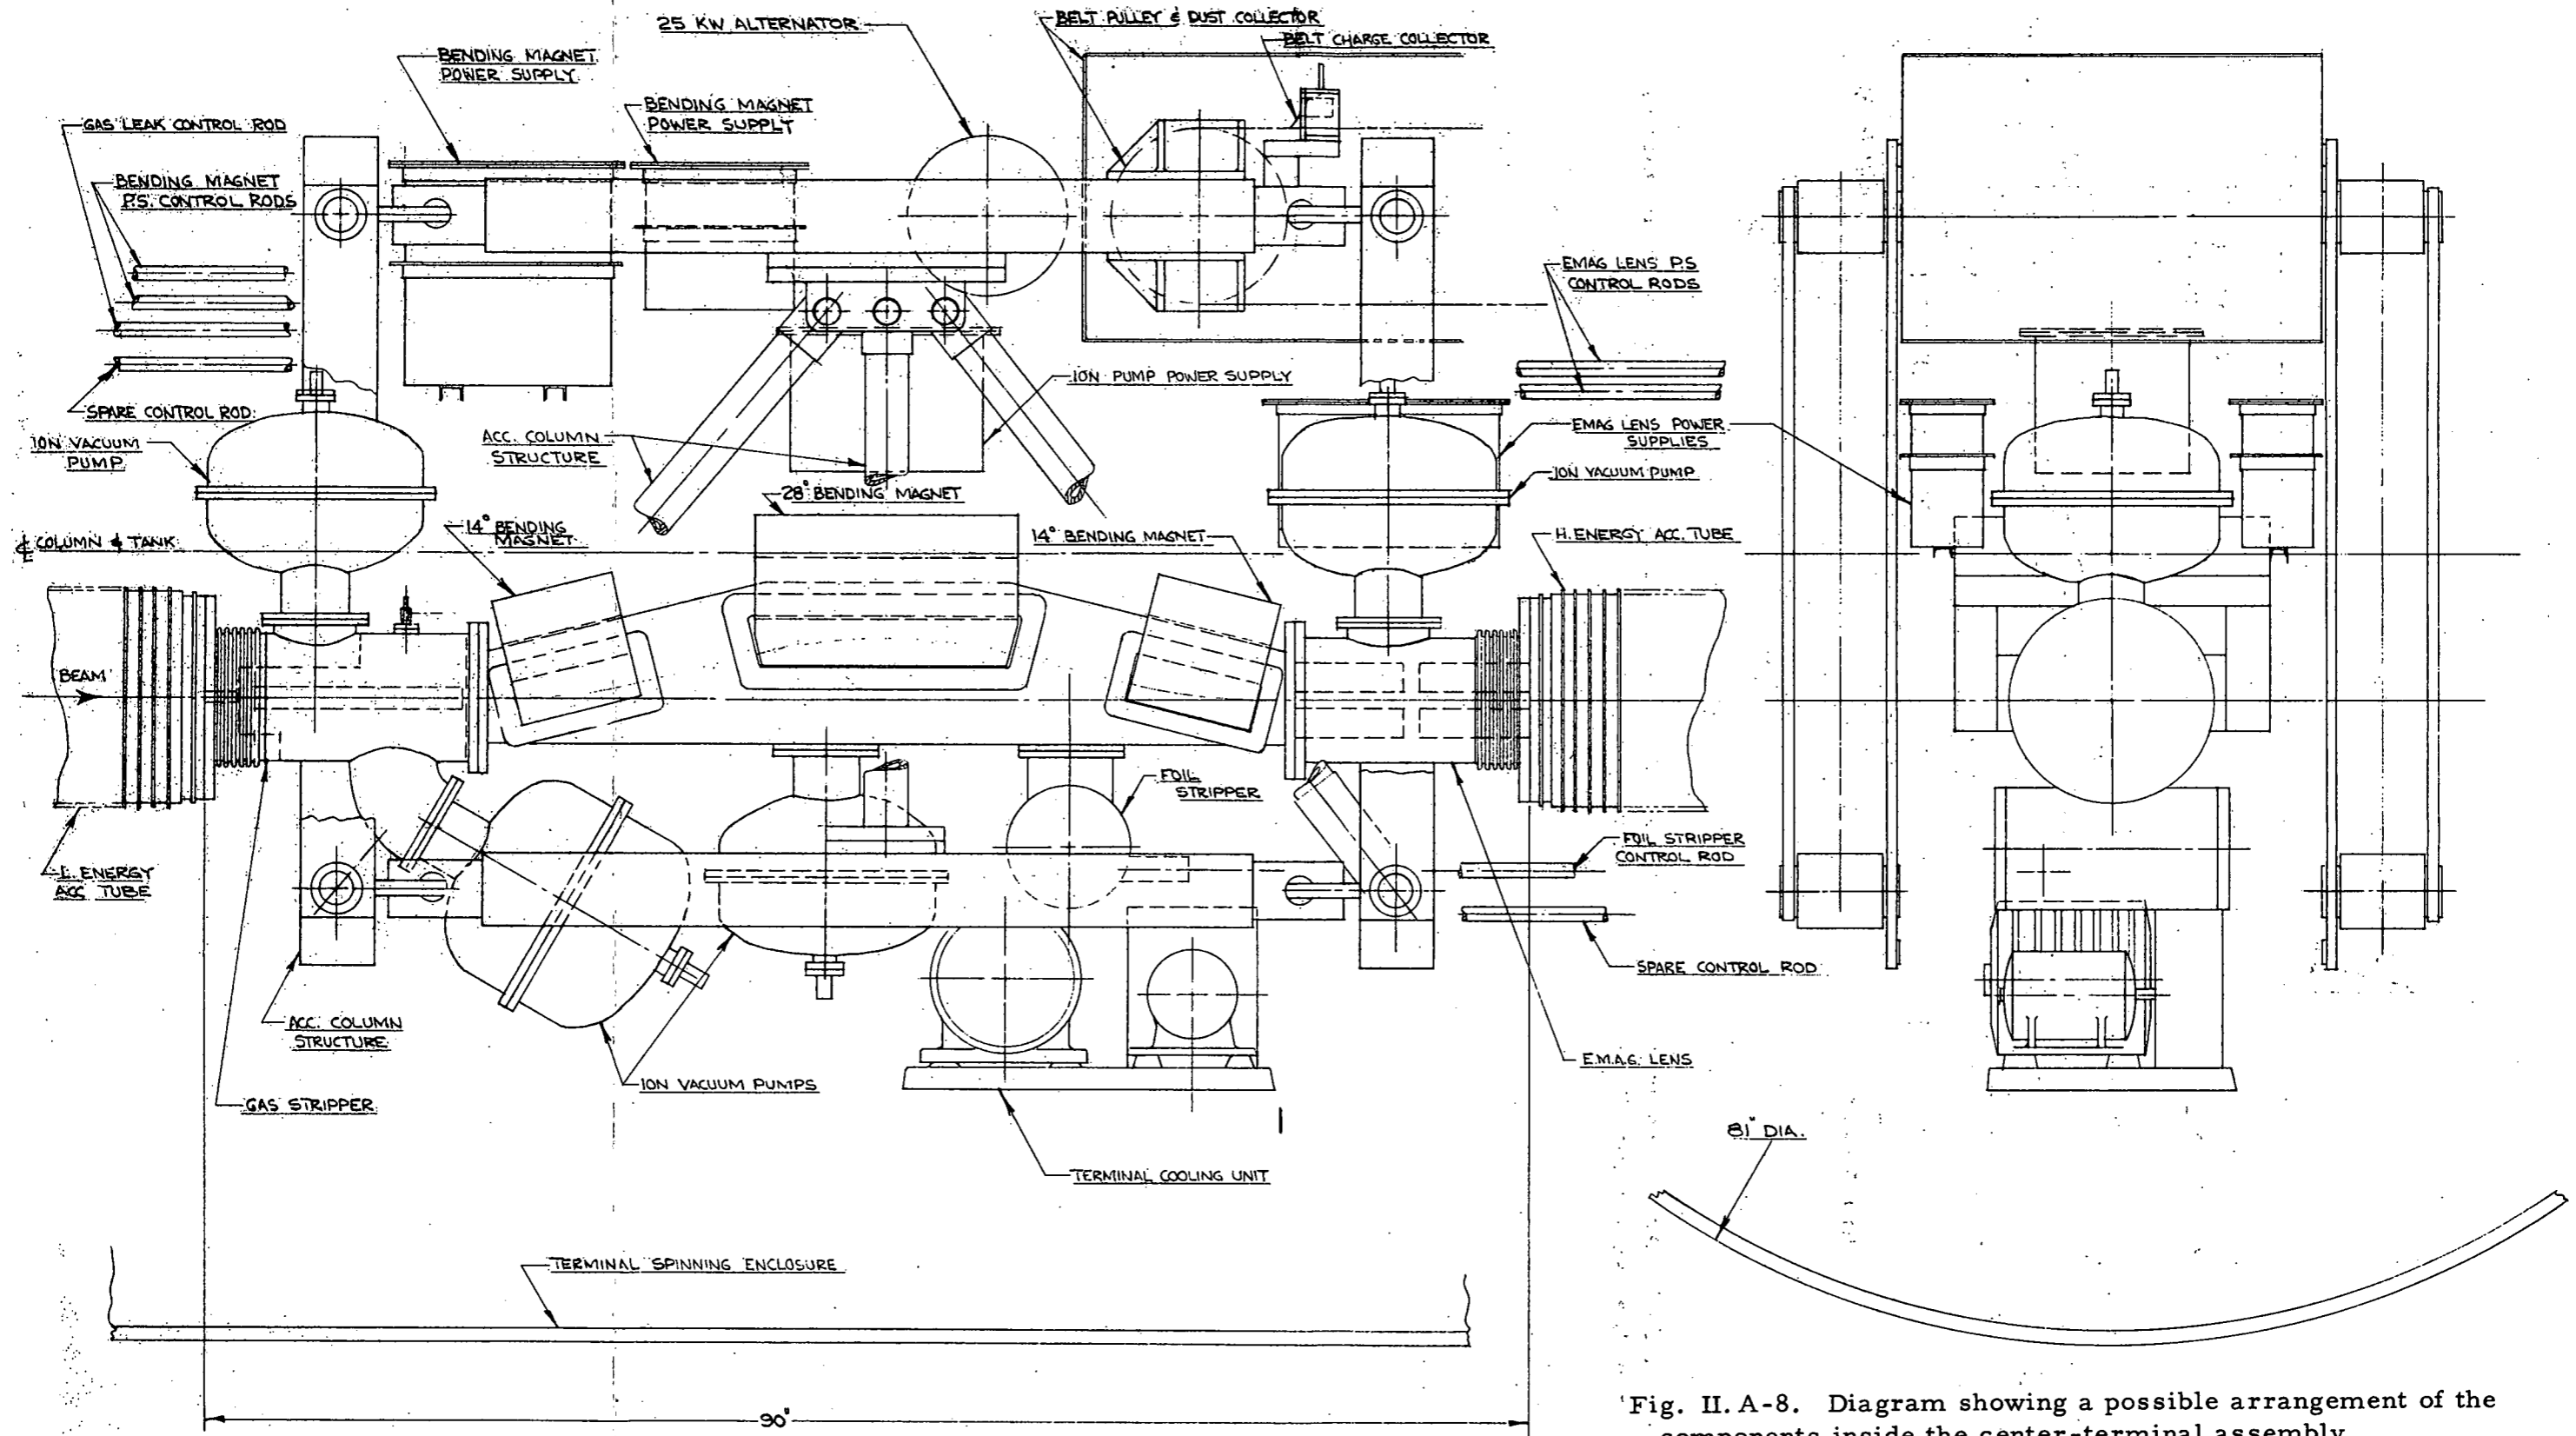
Diagram showing a possible arrangement of the components inside the center-terminal assembly.
